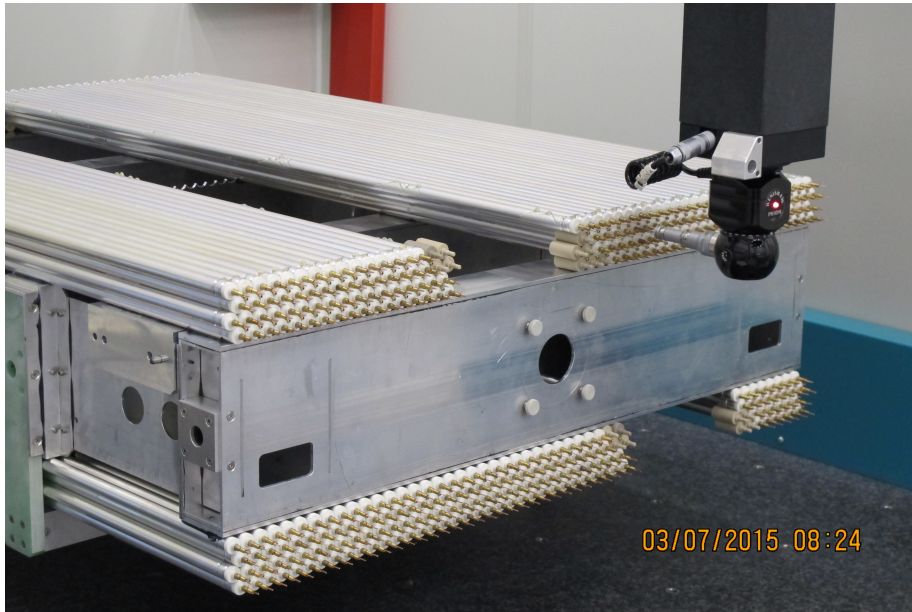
Assembly of a BMG sMDT chamber. The first multilayer has been assembled, the alignment sensor platforms have been mounted on the inside of the multilayer and the spacer frame is positioned on top, waiting for the assembly of the second multilayer on top. The wire grids at each chamber end are defined by the precisely machined grids of holes into which the cylindrical endplug reference surfaces are inserted. The tube and corresponding jig layers are stacked, including the spacing between the two multilayers.
